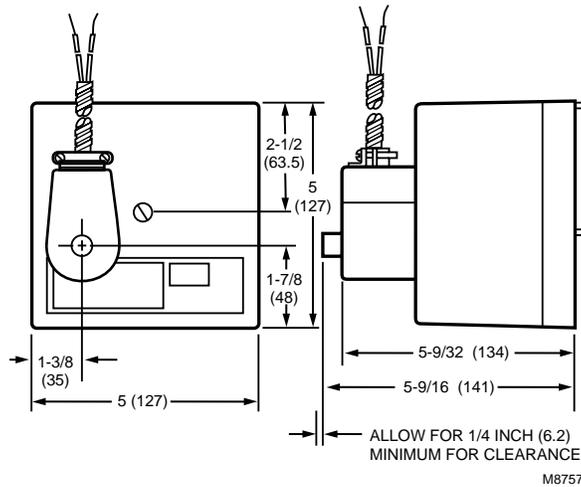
Mounting dimensions of R7795 primary with 198365A,B,C remote reset cover, in in. (mm).
